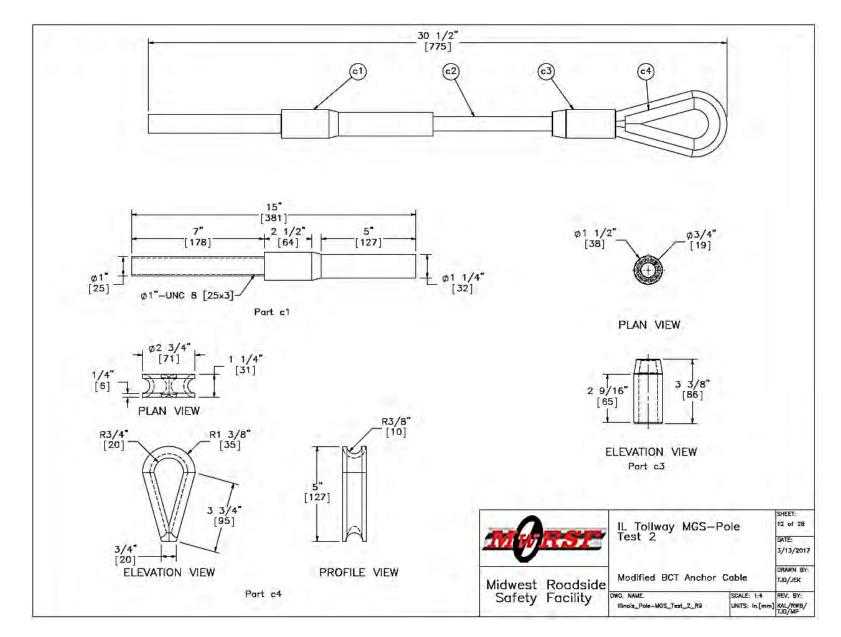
Modified BCT Anchor Cable, Test No. ILT-2
